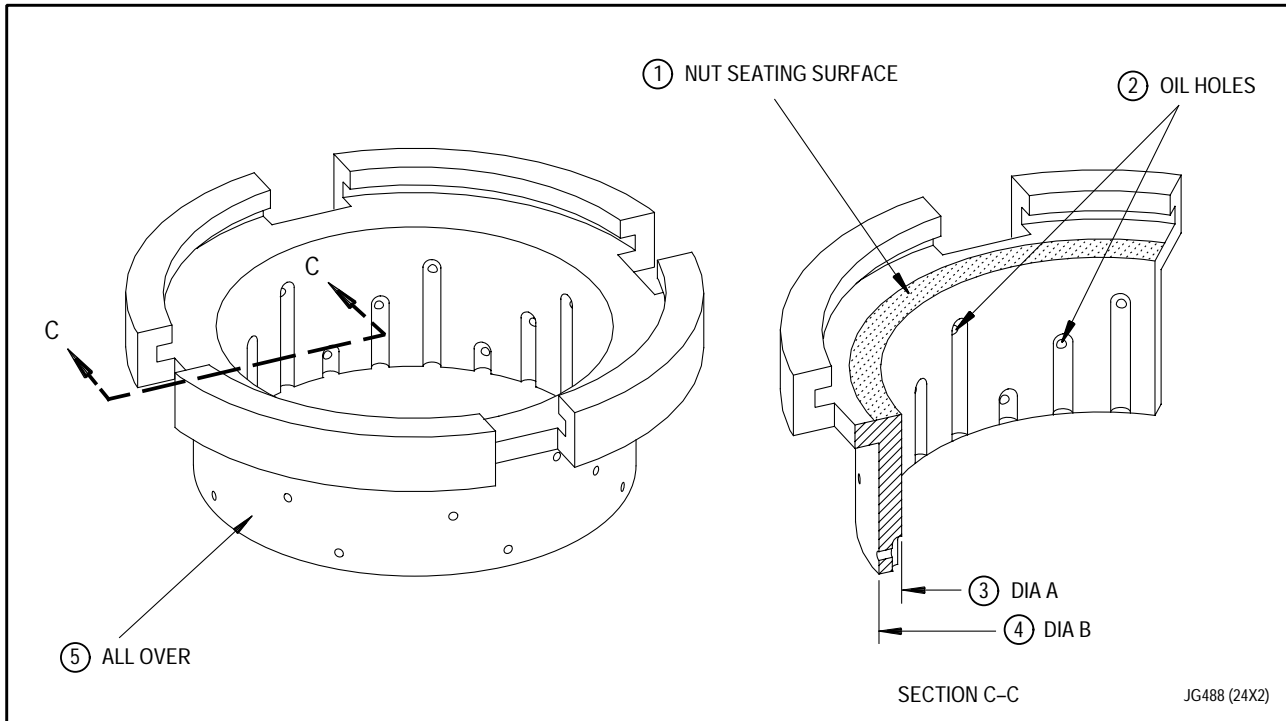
Gearbox Drive Gearshaft Sleeve - Inspection
